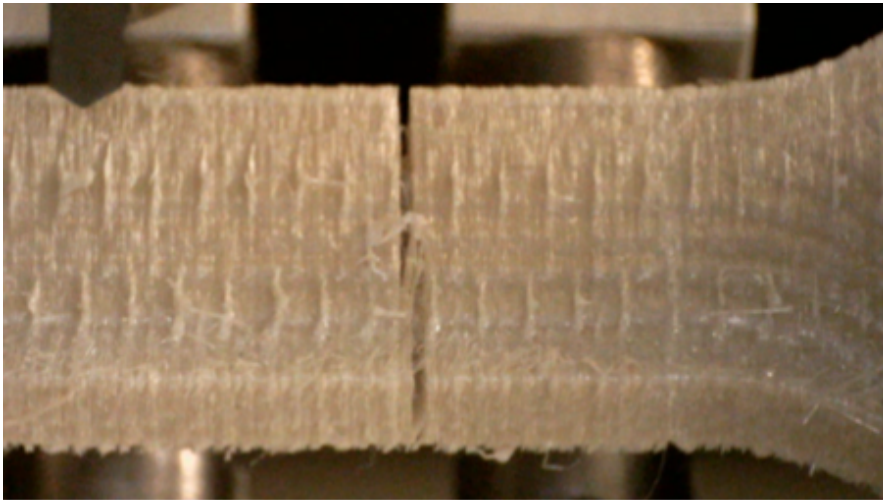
Example of fracture in a B2 specimen (medium AB) tested with the Zwick setup.
